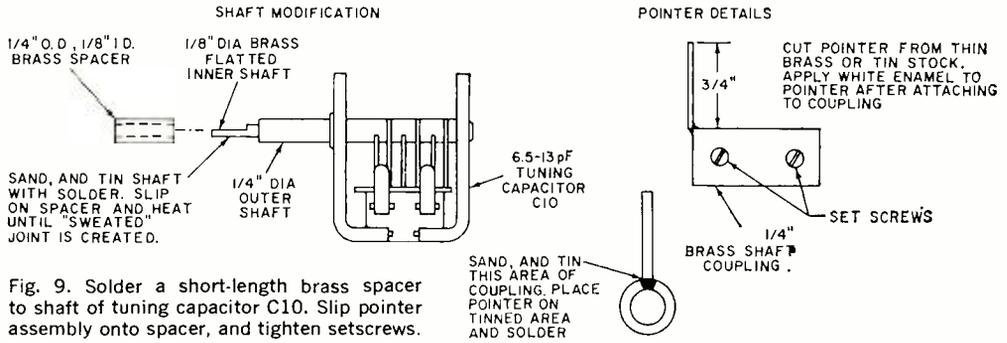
Solder a short-length brass spacer to shaft of tuning capacitor C10. Slip pointer assembly onto spacer, and tighten setscrews.
